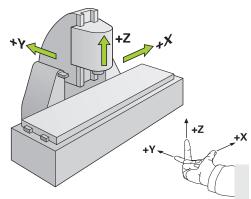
Assignment of the rectangular coordinate system to the machine axes
